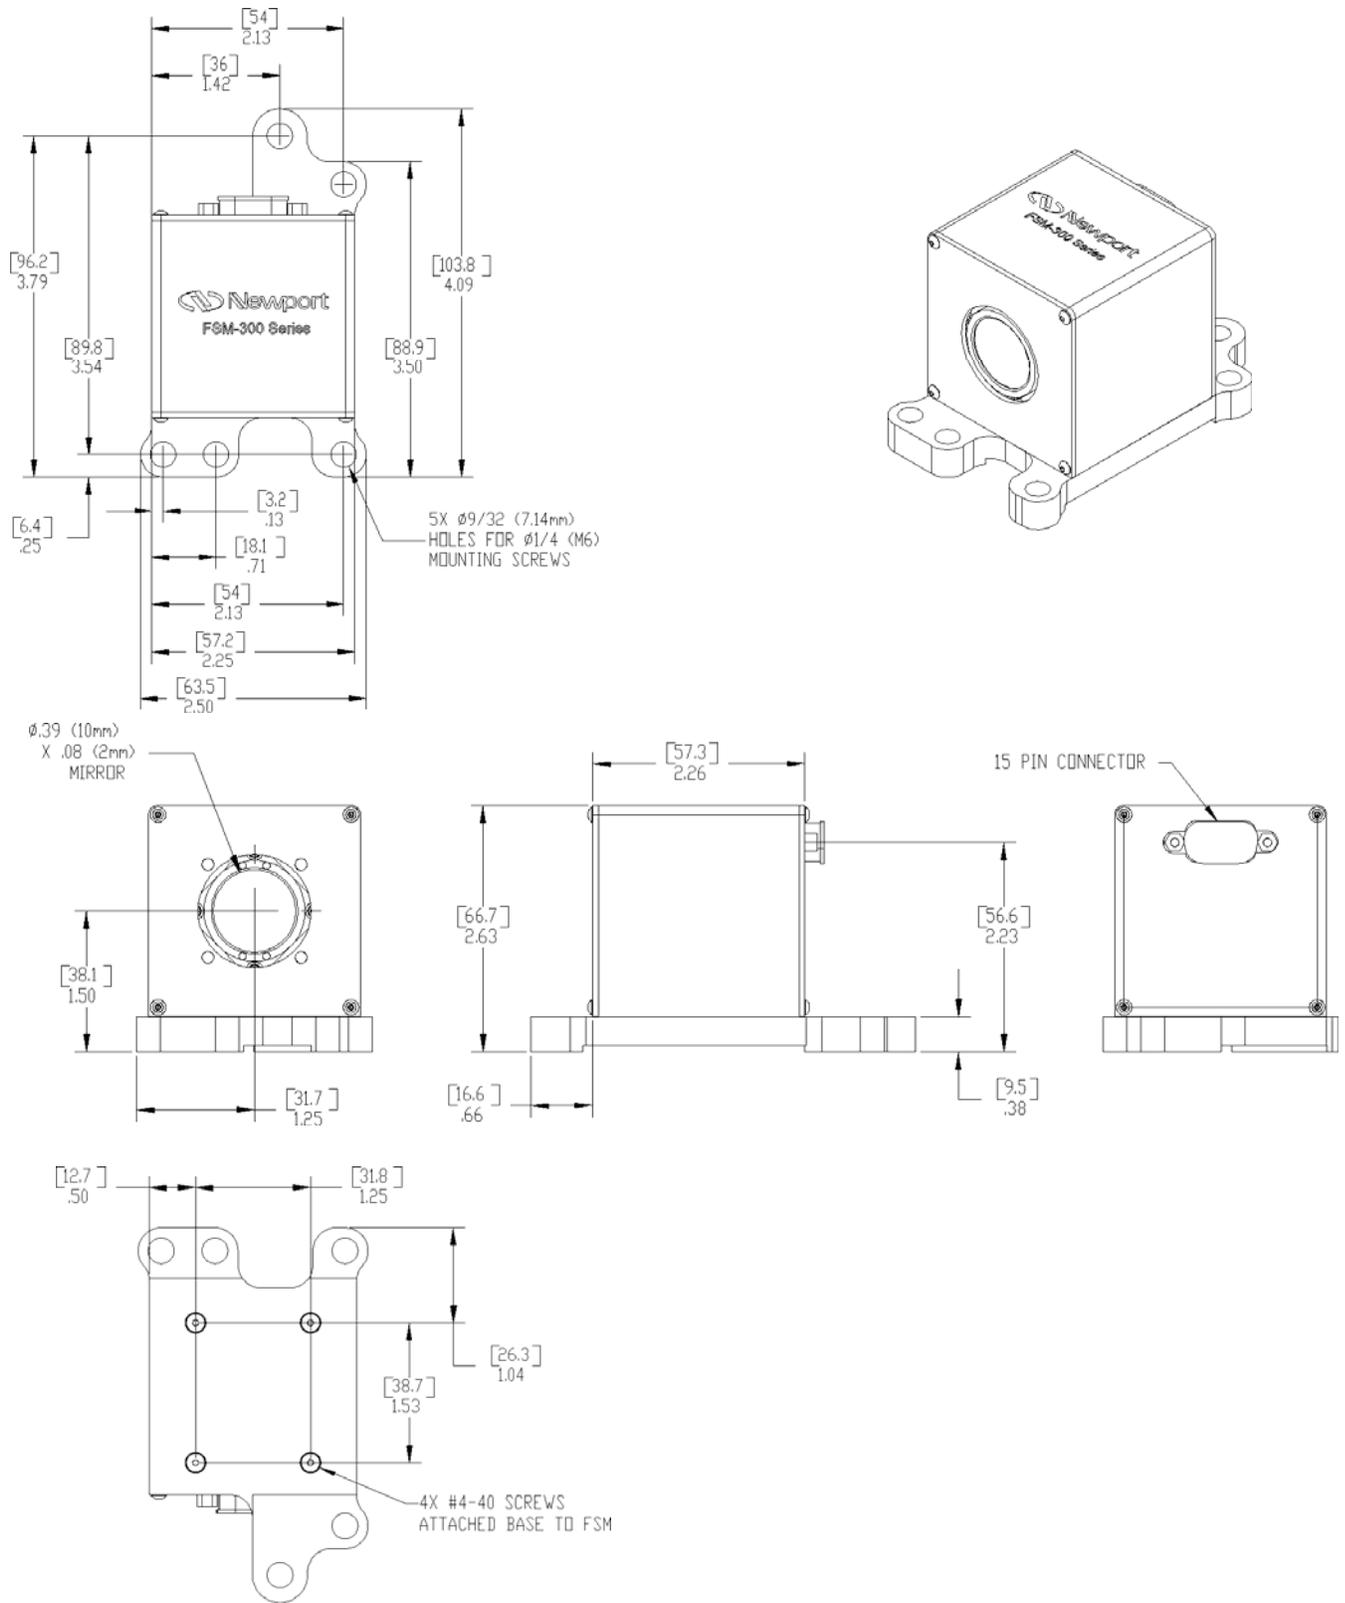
Detailed Drawing of FSM-300 Mirror Head Housing.
